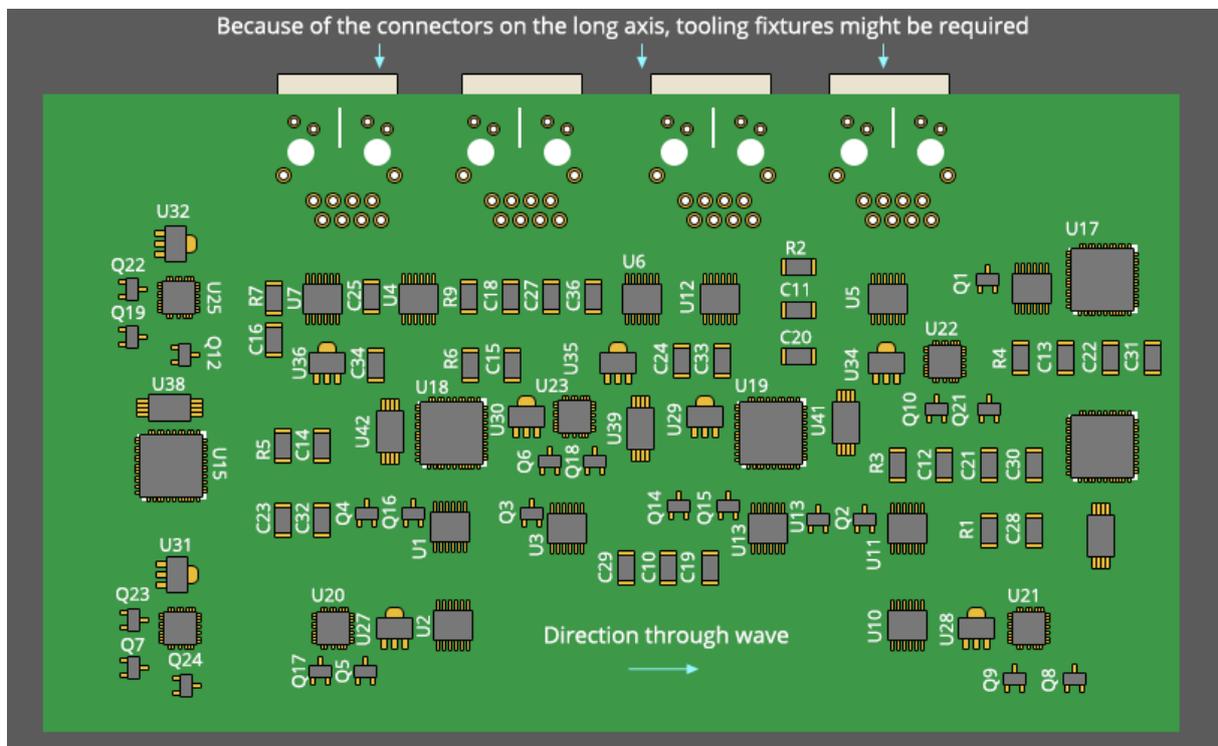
Bottom Side Component Orientation for Wave Solder (Non-Preferred)
